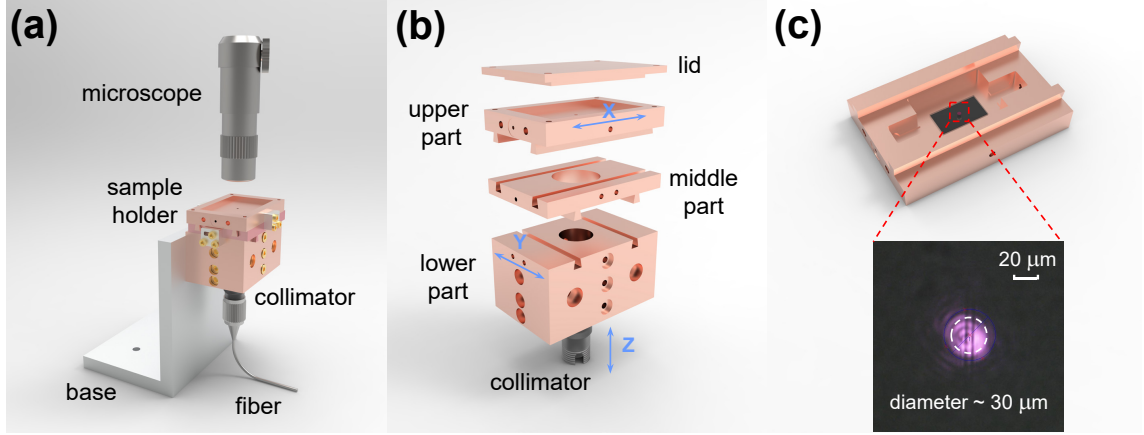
[Color online] (a) The complete fiber-to-detector assembly for manual alignment. (b) The exploded view of the sample holder. (c) The incident light is focused onto the detector which is glued to the upper part of the sample holder. The recorded image of the transmission light through the detector and substrate shows a light spot of FWHM diameter $\approx 30 \mu\text{m}$.
